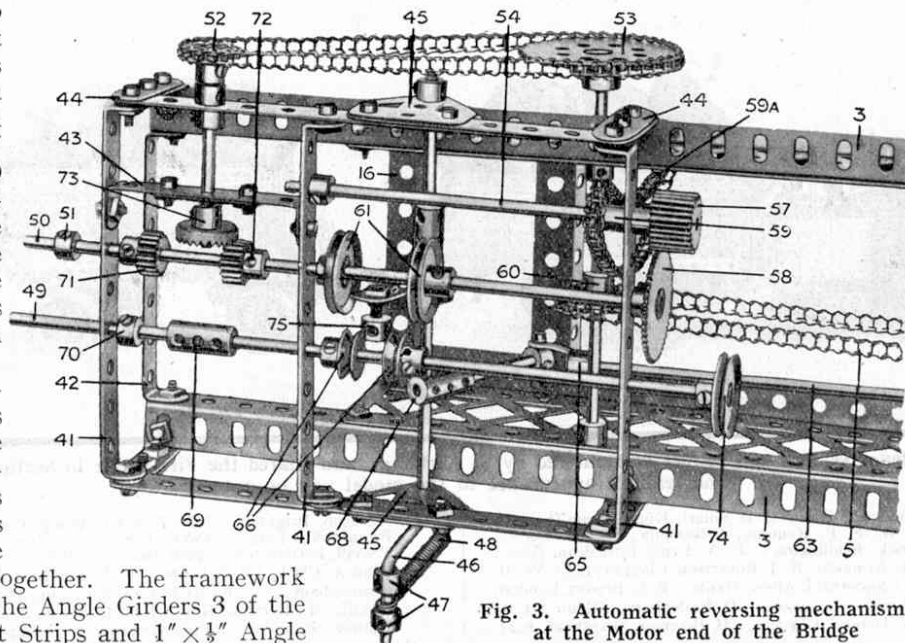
Automatic reversing mechanism at the Motor end of the Bridge
